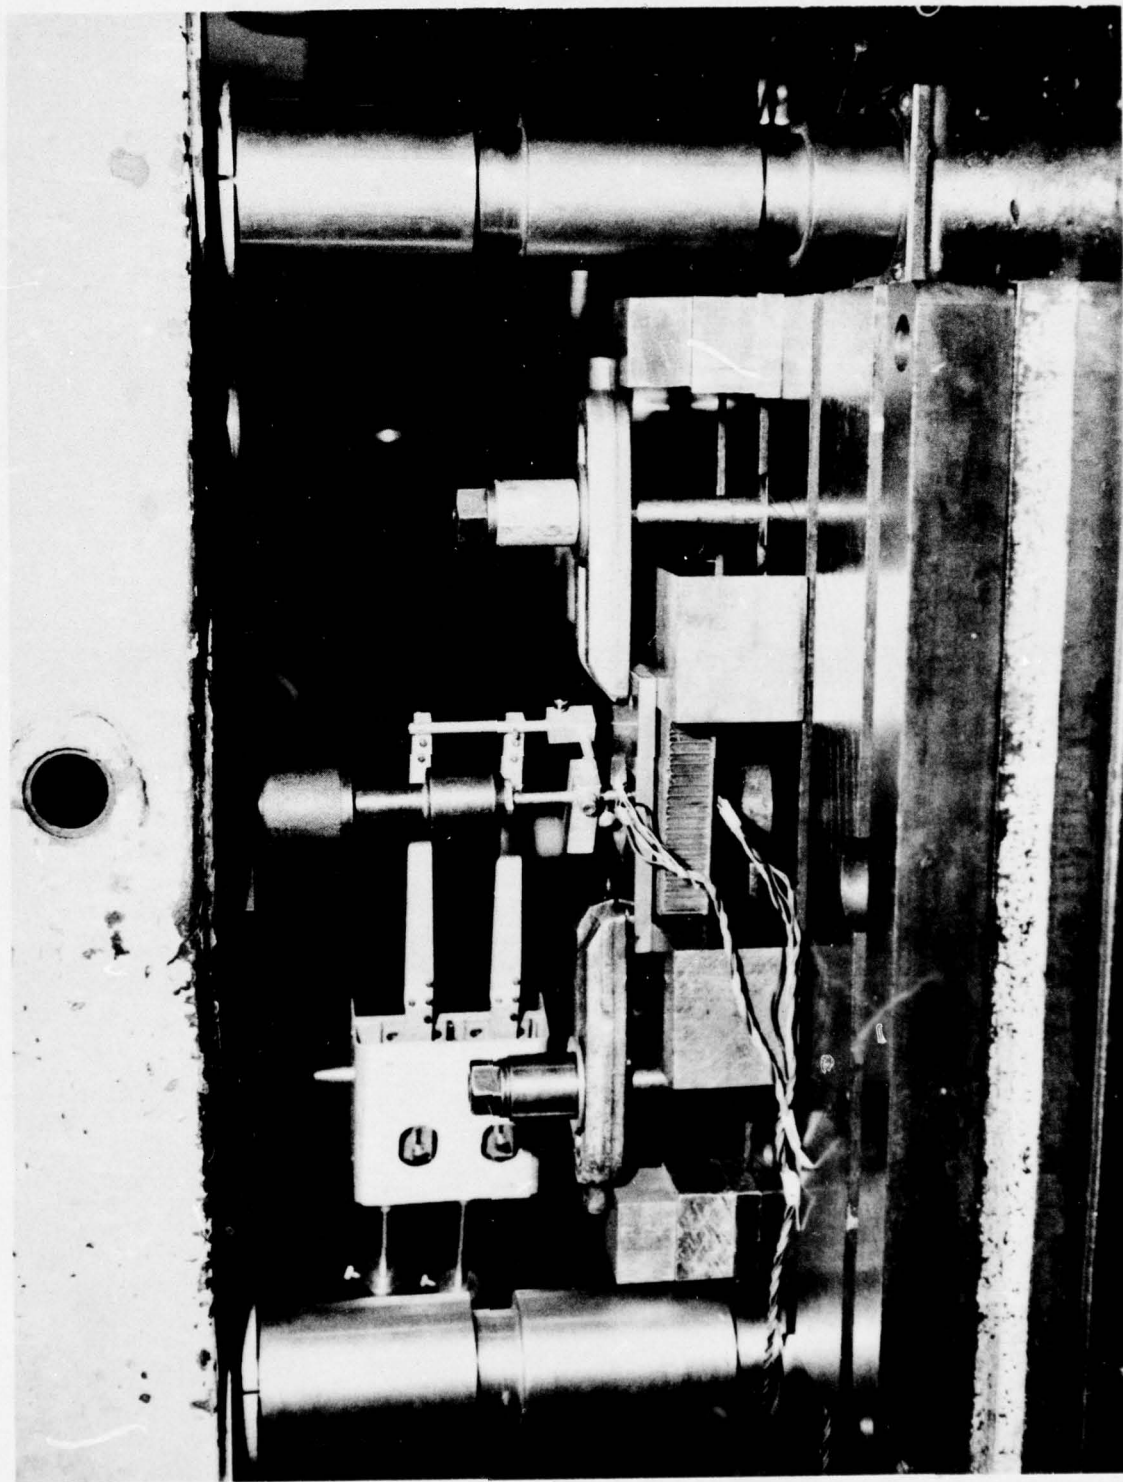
INSERT SPECIMEN TEST FIXTURE (TR-135)
